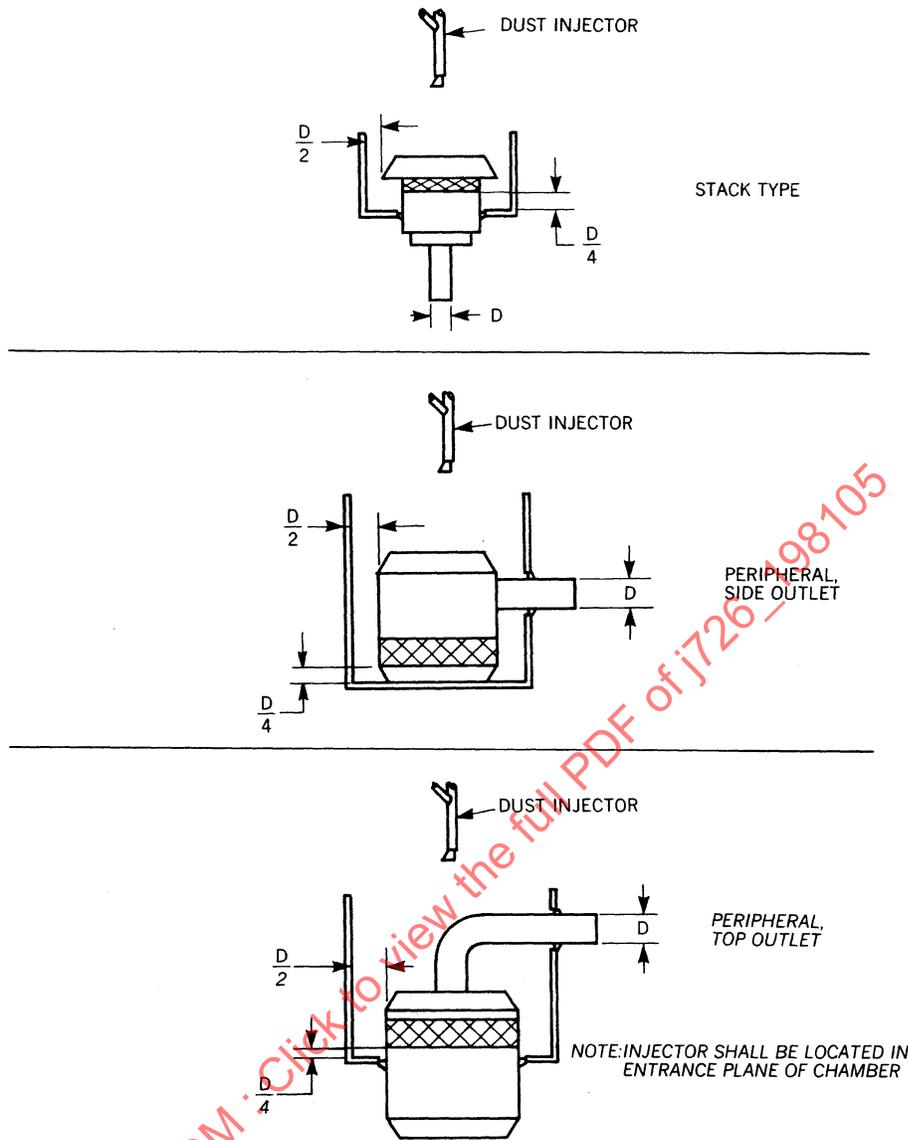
B—NON-TUBULAR INLET AIR CLEANER TEST CHAMBER ASSEMBLIES
